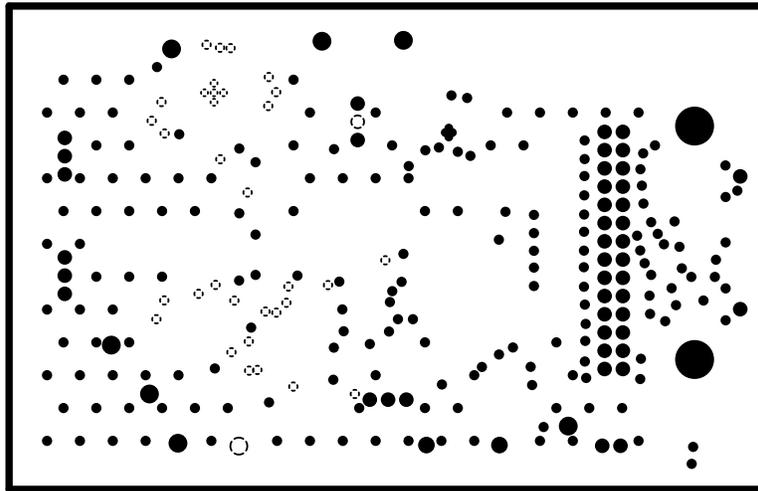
PCB Layout for the ADS1282EVM (Internal AVSS Plane)
